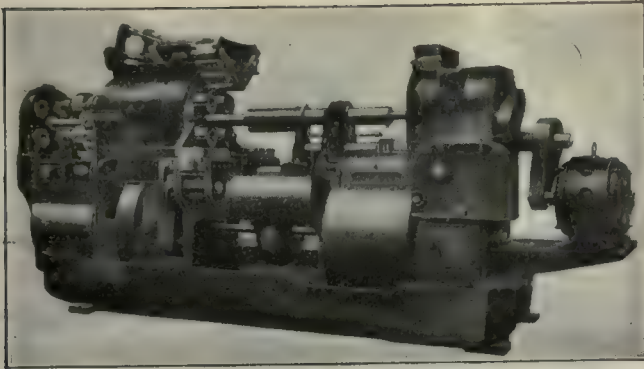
RYERSON-CONRADSON MOTOR-DRIVE ENGINE LATHE
